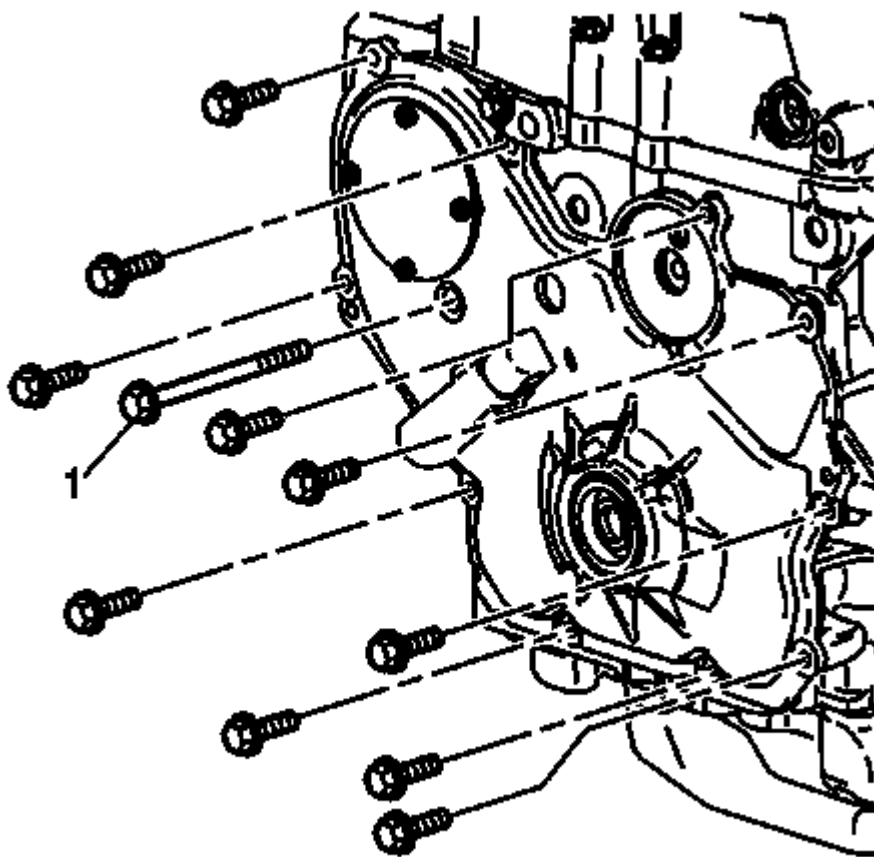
Engine Front Cover Bolts & Long Water Pump Bolt
